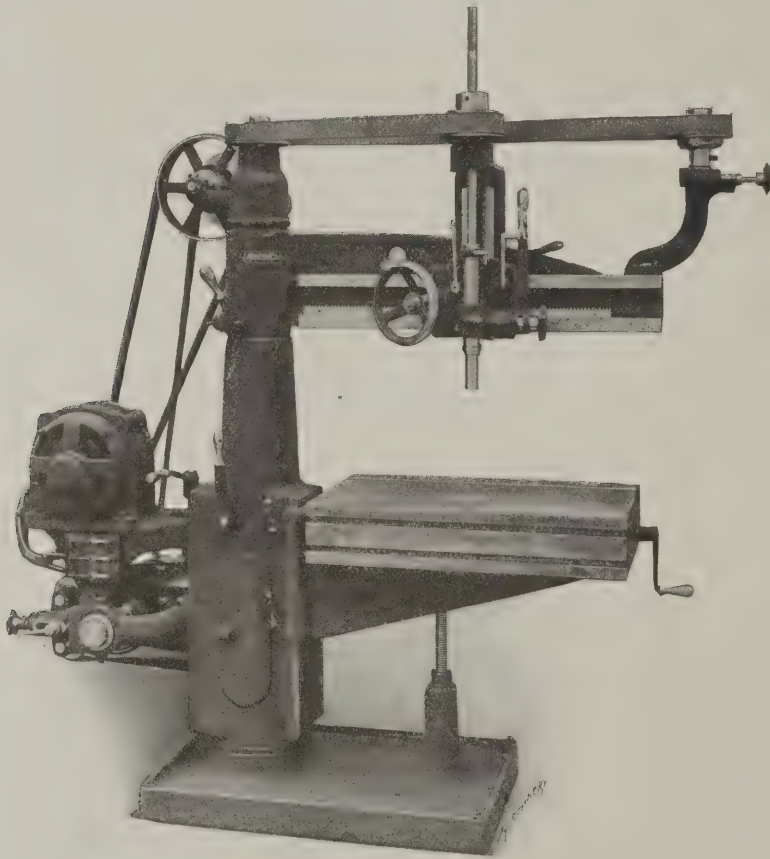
Motor-driven Radial Drill equipped with Elevating Table and Tapping Attachment
